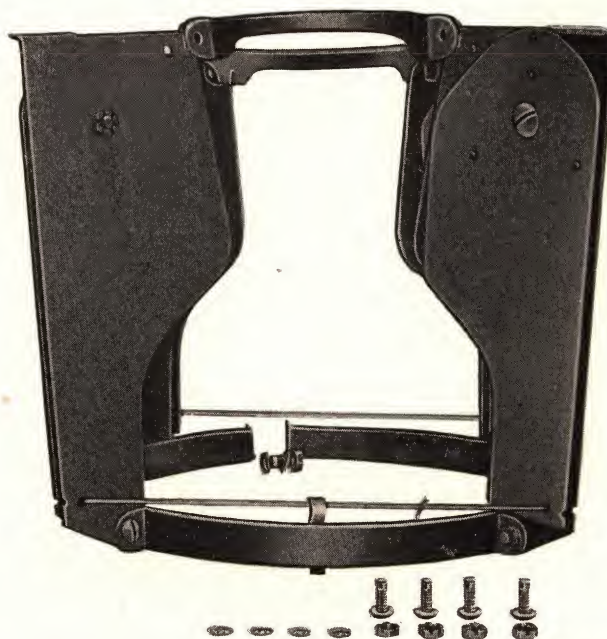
Tail Assembly with Four Bolts and Nuts Removed from After Band
